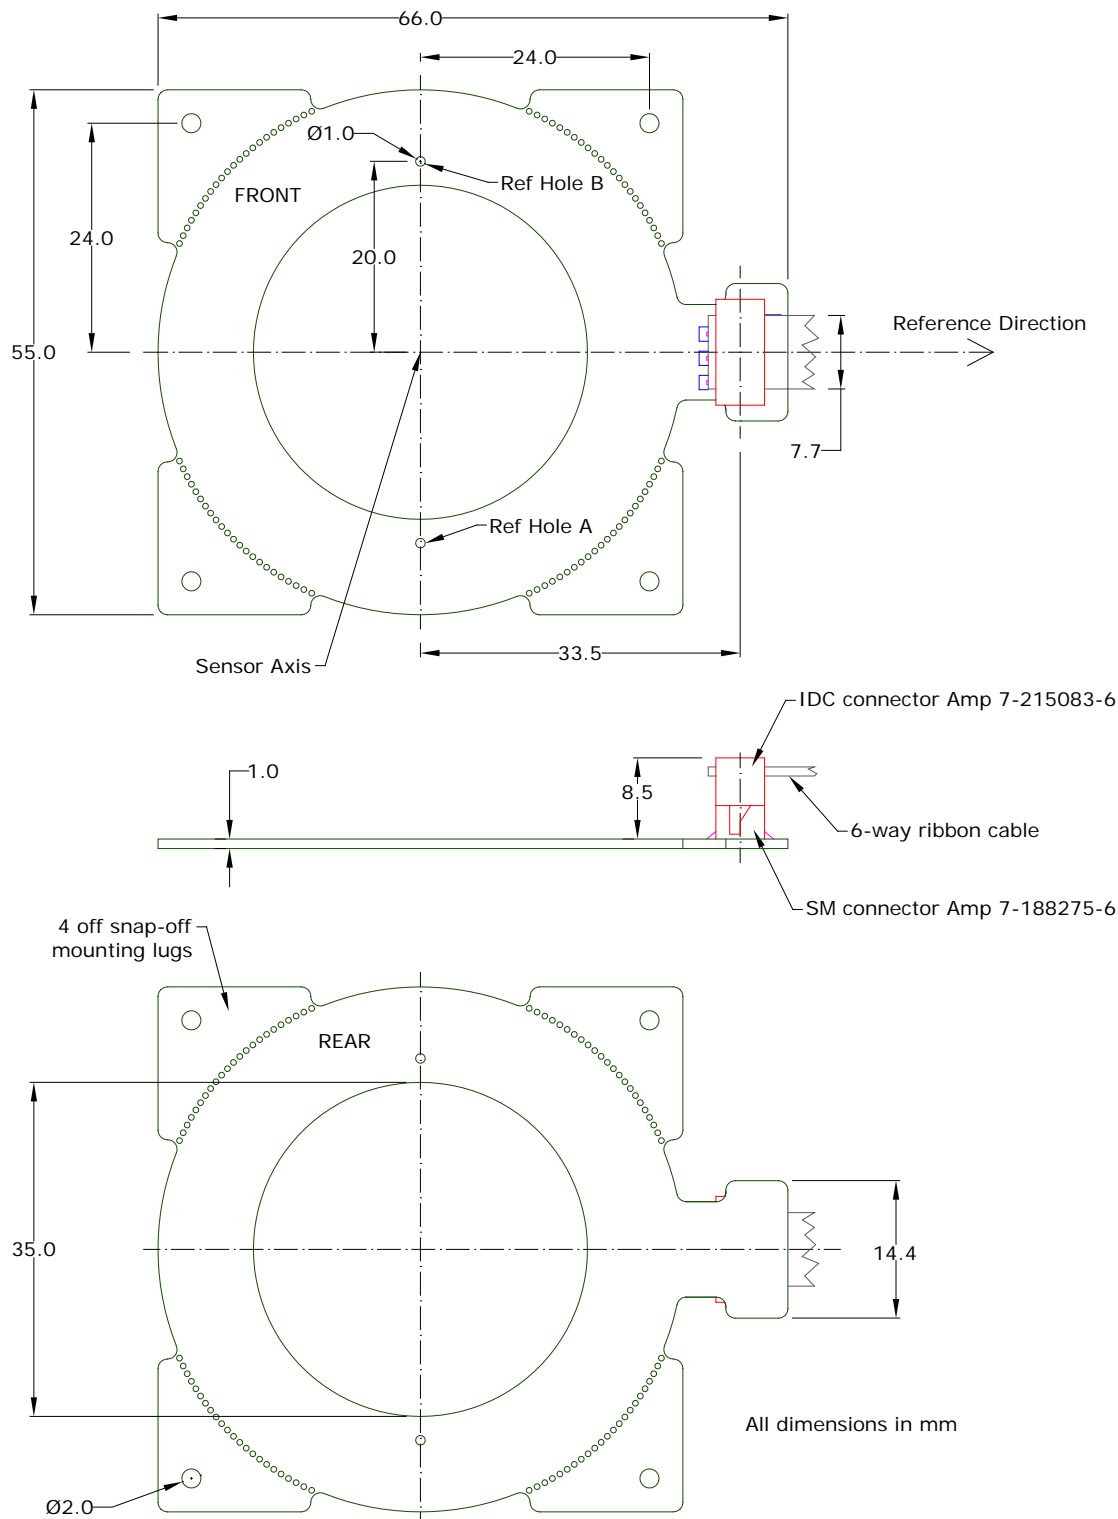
Assembled Sensor 013-0026 shown mated with connector 013-6001
